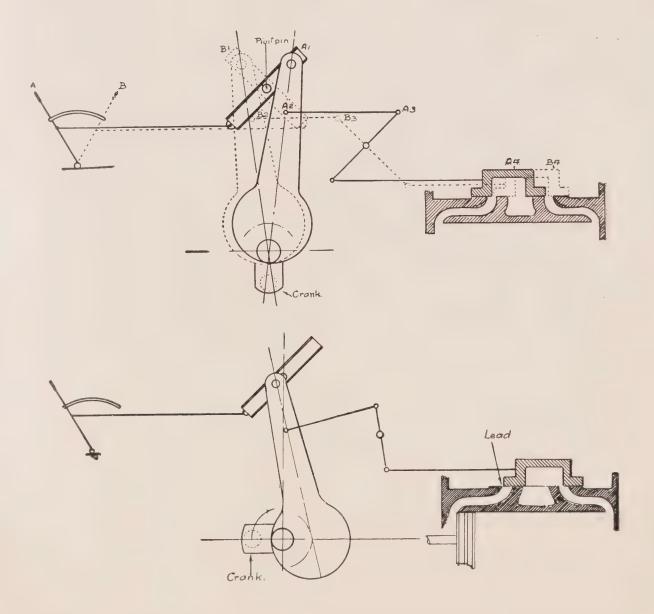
Diagrammatical sketch of Woolf reversing gear showing method of changing valves.
